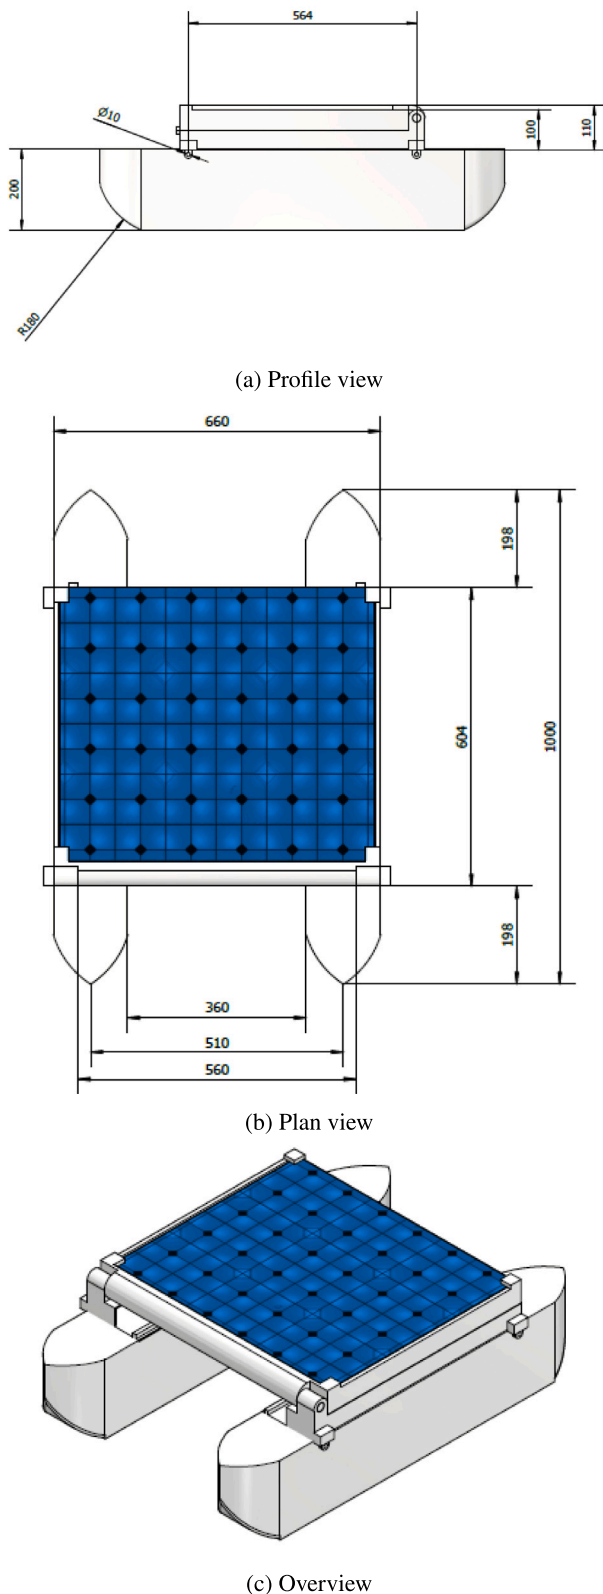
Drawings of the catamaran floating solar unit; dimensions in mm.
